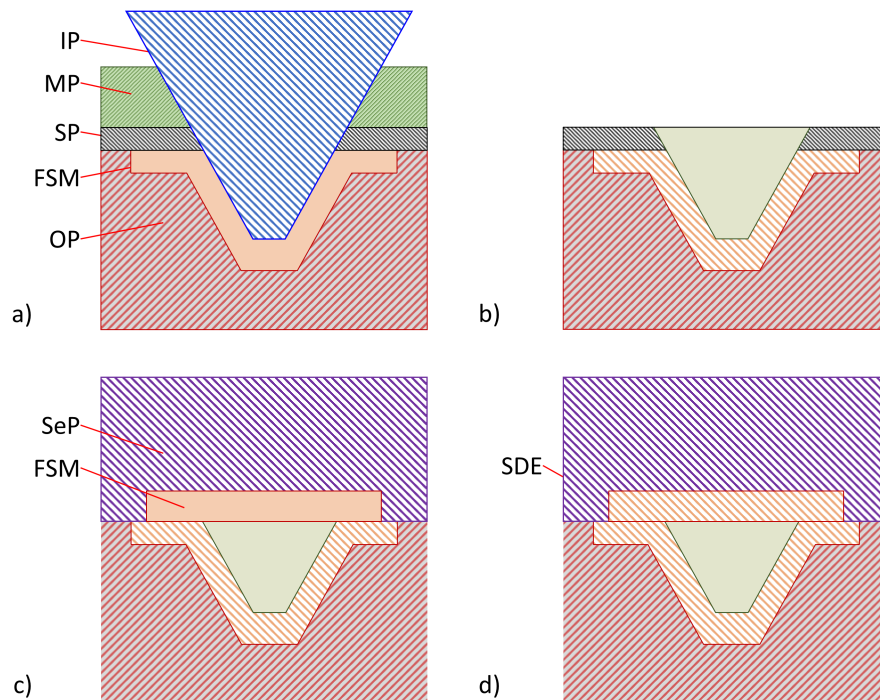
a) the outer (OP), sheet (SP), middle (MP) and inner (IP) parts were pressed together, which shaped the degassed fresh silicone mixture (FSM) as the lateral surface of the cone. b) the IP and the MP were removed to fill the vulcanized lateral surface (VLS) with degassed fluid filling (FF) through the SP. c) the SP was removed and the half open VLS was sealed with the sealing part (SeP) that was filled with FSM. d) after the second vulcanization process the spring-damper-element (SDE) was enclosed and hermetically sealed.
